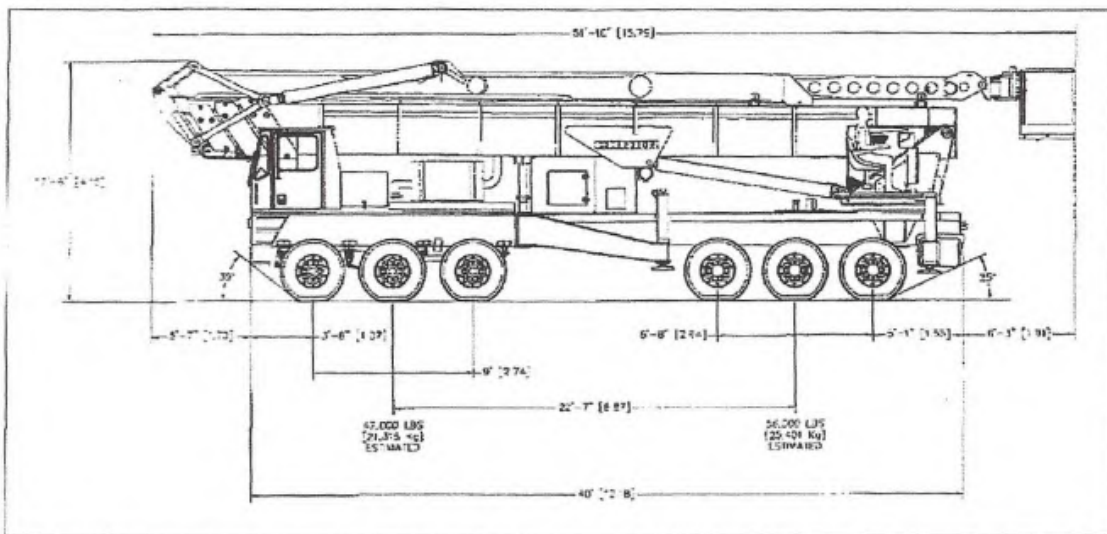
Example Aerial Lift Crane to be Used During Construction (Roadable Length 52 Feet; Width 8 Feet 6 Inches)
